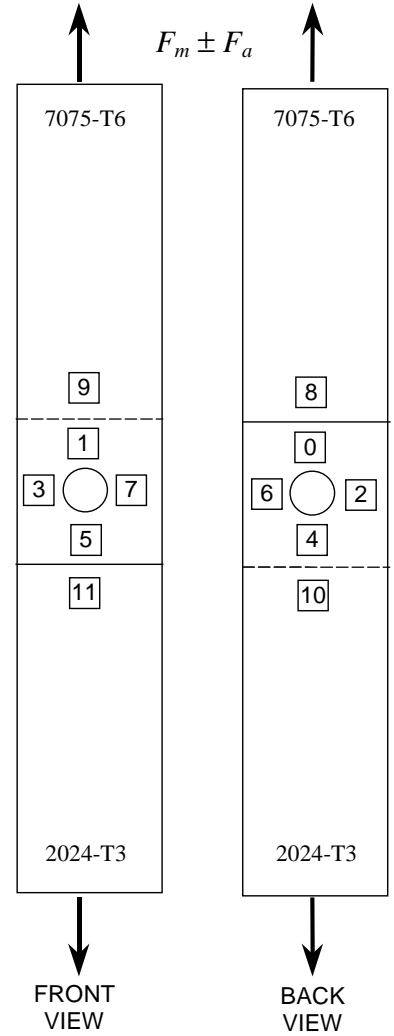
Spot-welded lap-joint specimen schematic.
